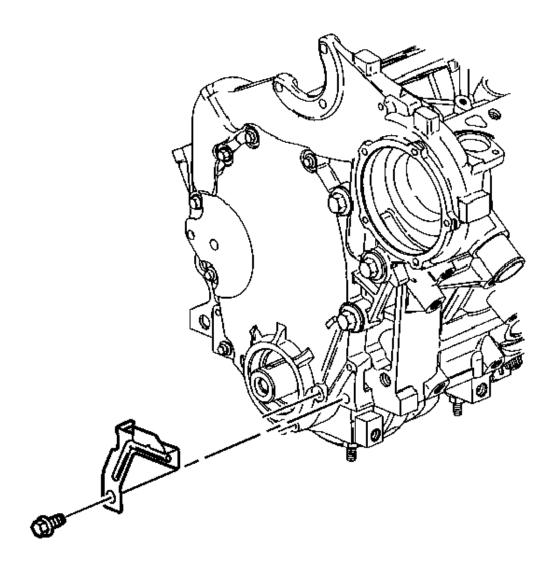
Installing Crankshaft Position Sensor Wiring Bracket Courtesy of GENERAL MOTORS CORP.
